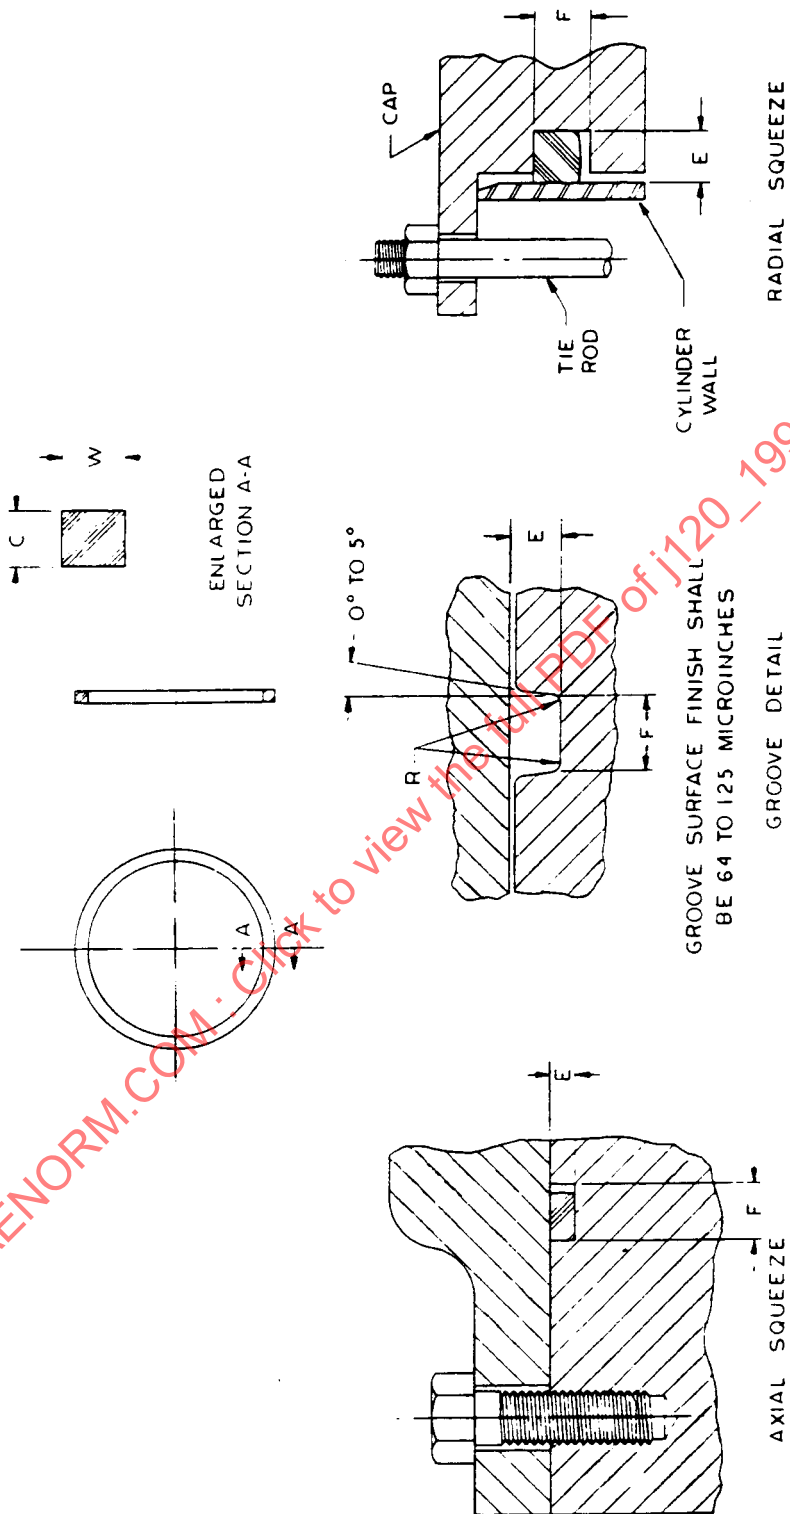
TYPICAL DESIGN EXAMPLES FOR RECTANGULAR SECTION SEAL RINGS
